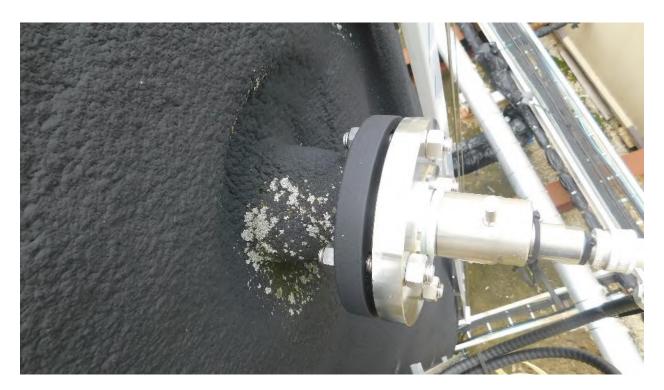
1" Threaded Pressure Gauge Nozzle
